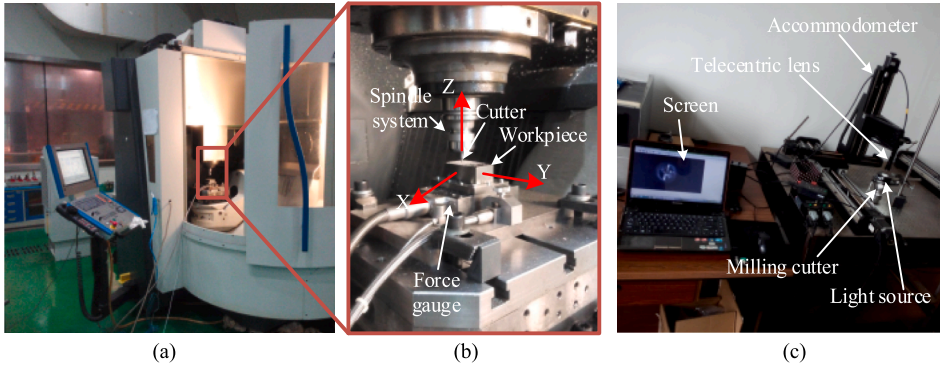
Experimental device: (a) CNC machine; (b) Milling platform; (c) Tool wear measuring platform.
